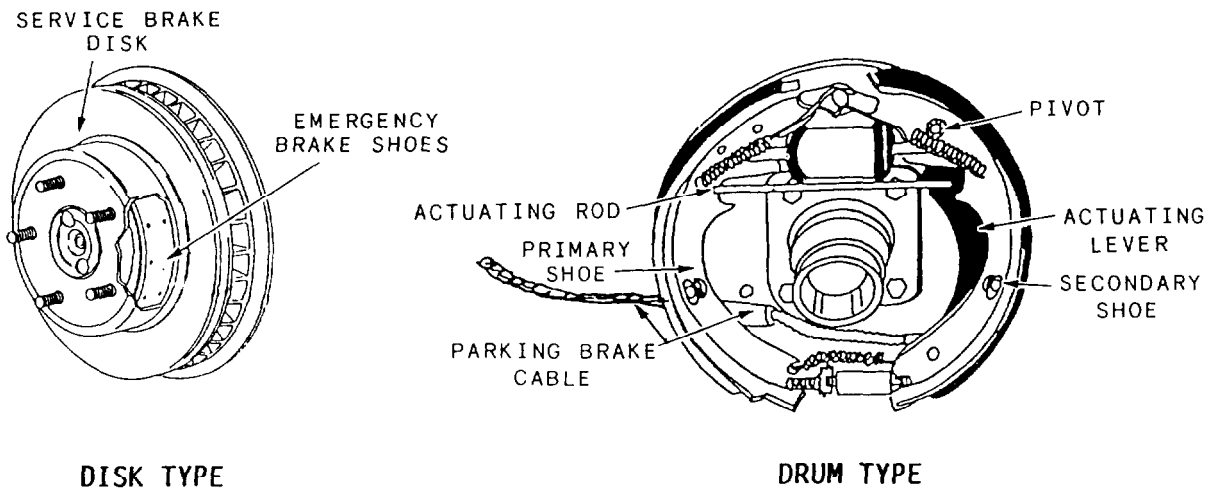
Automotive type emergency/parking brake axle mounted.
